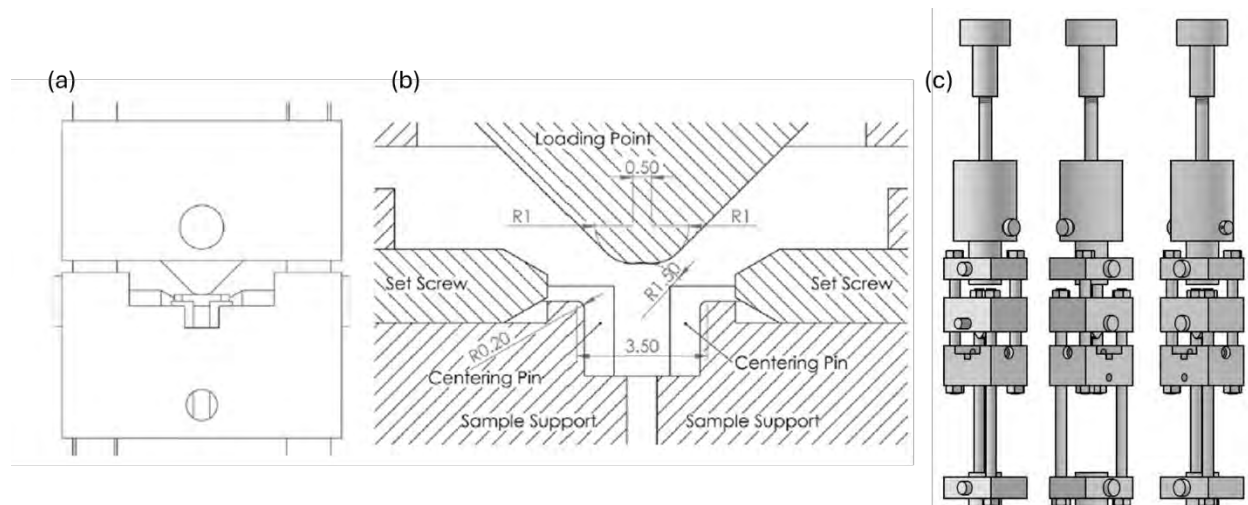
(a) Schematic, (b) cross-section view of the 4PB loading fixture [9] and (c) computer-aided design (CAD) drawing of the fully assembled loading fixture.
